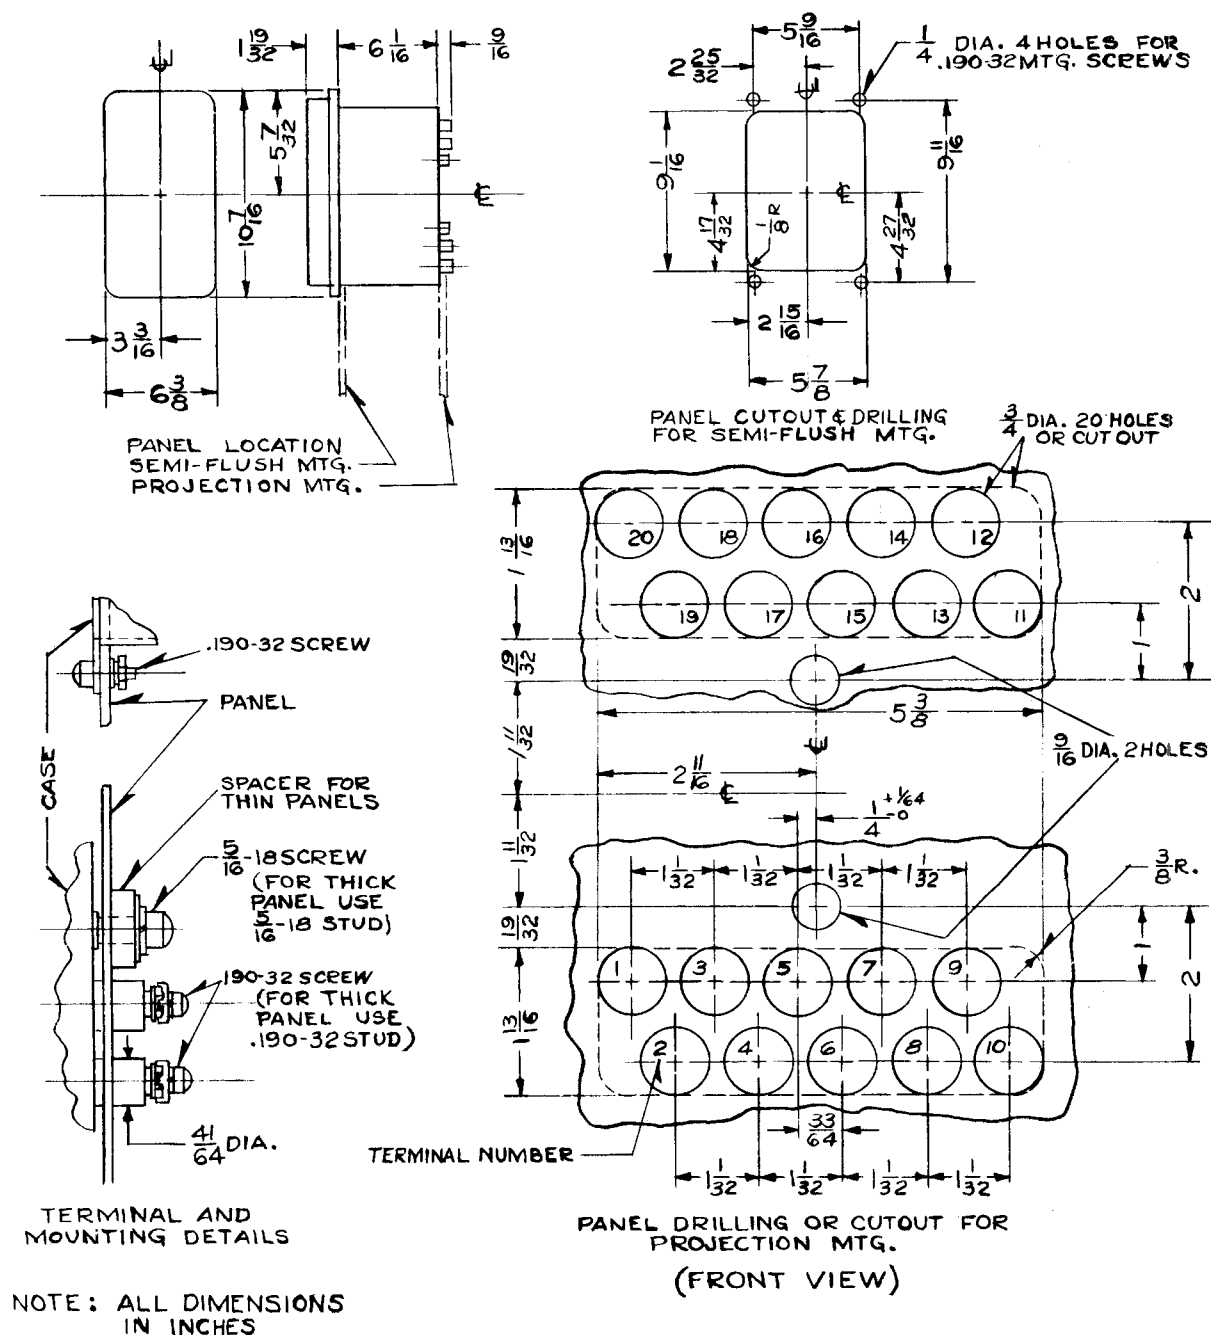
Outline and Drilling Plan for the Type FT11 Case
